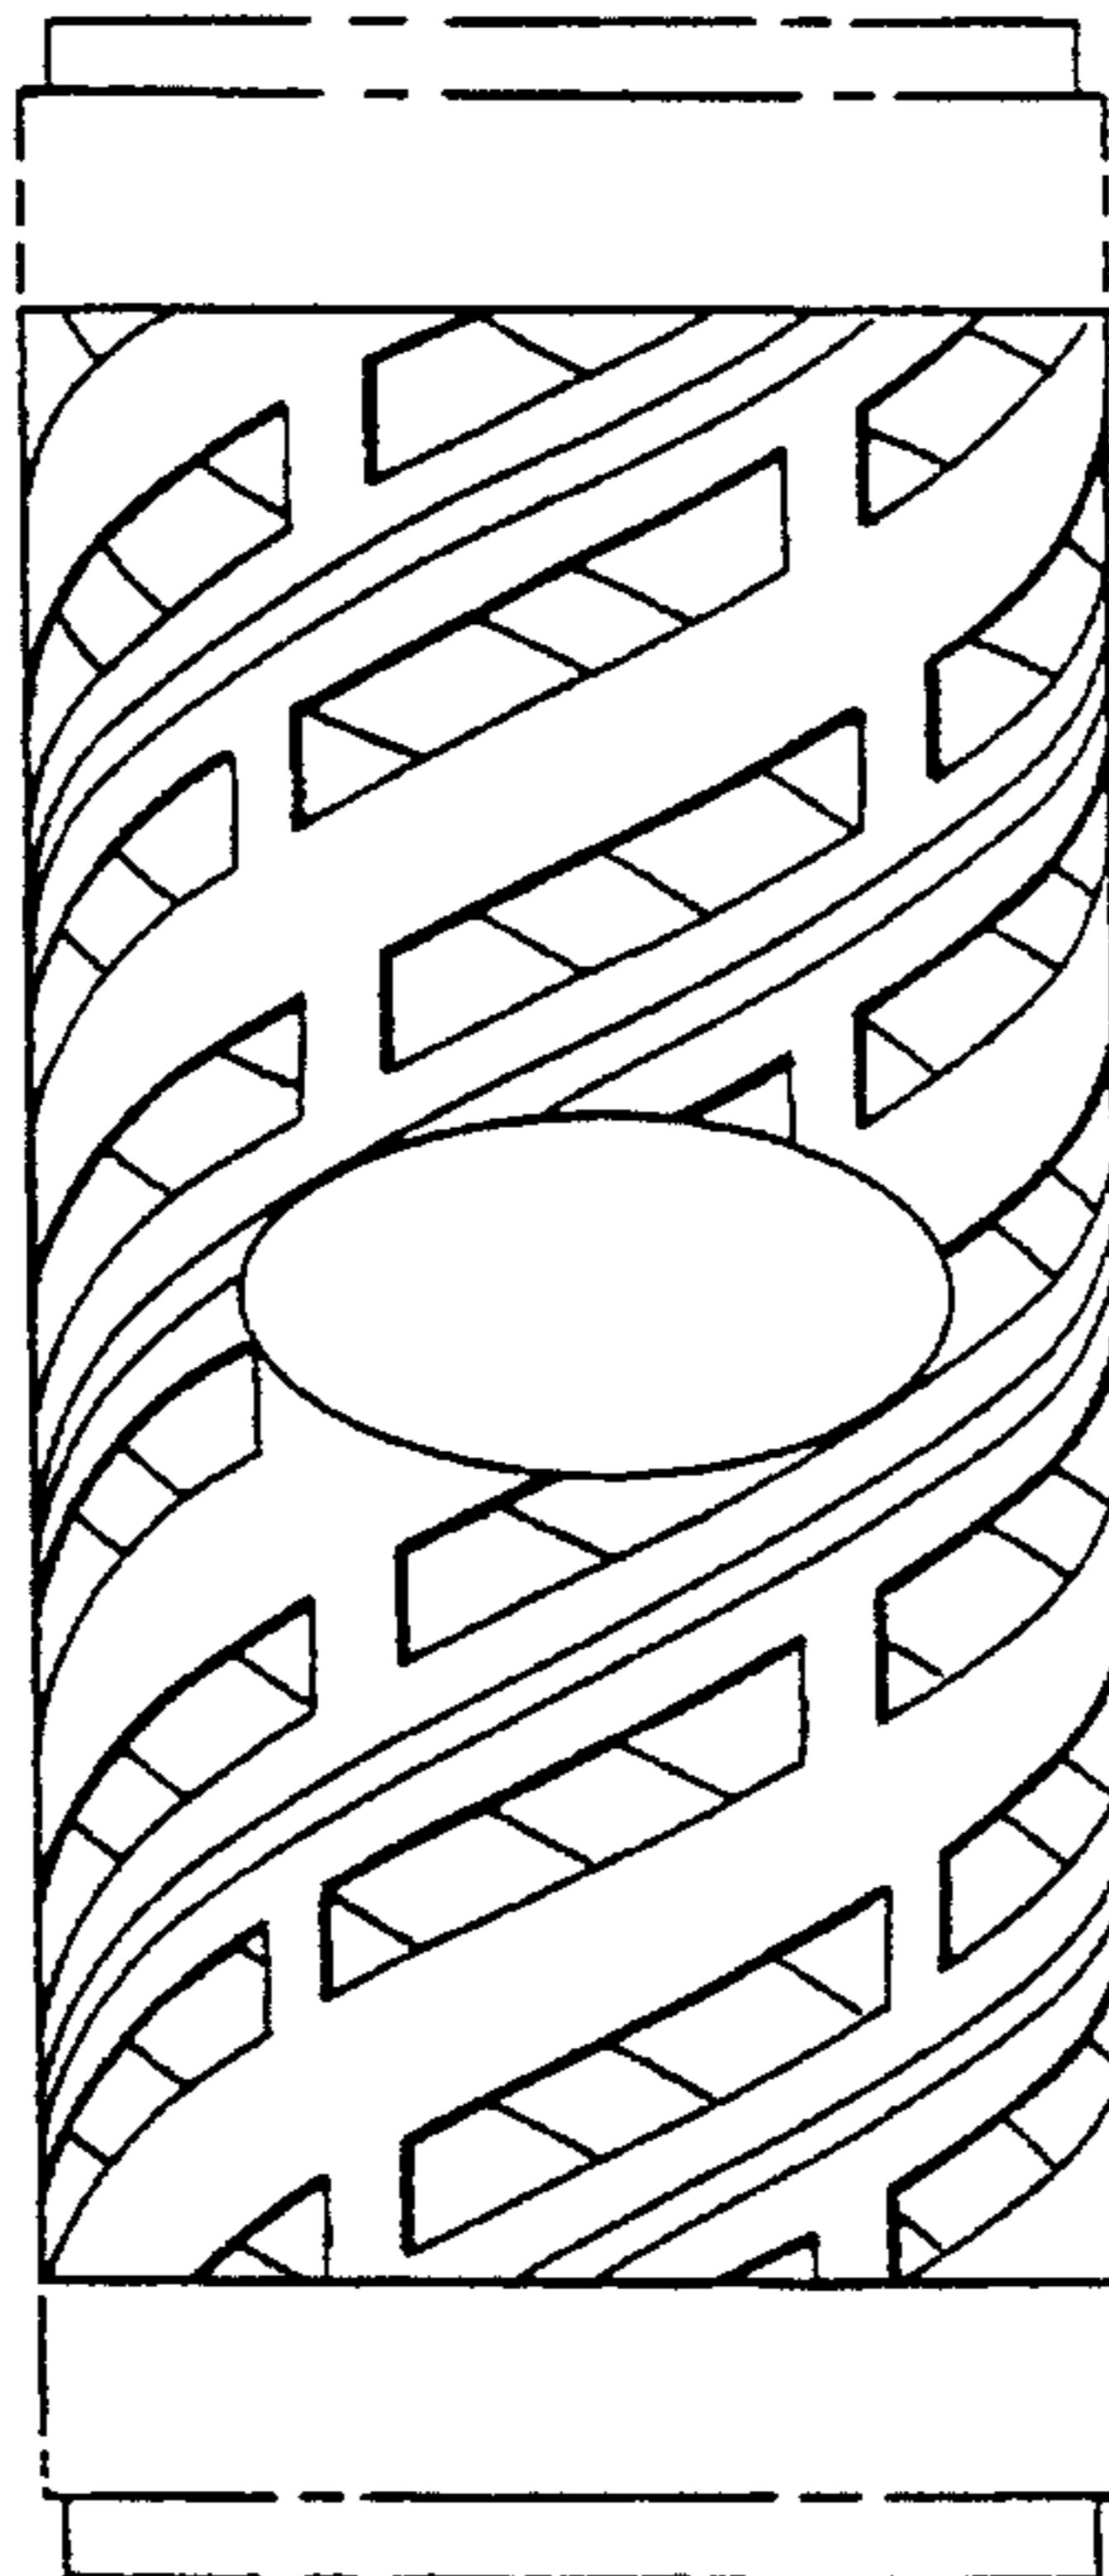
is a front view of a cylindrical cage for a filter showing a fourth embodiment of my design;
